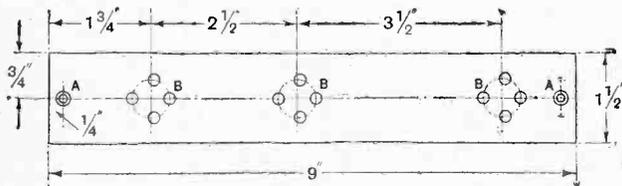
Valve panel. A, $1/8$ in. dia., countersunk for No. 4 wood screws; B, $3/16$ in. dia.
